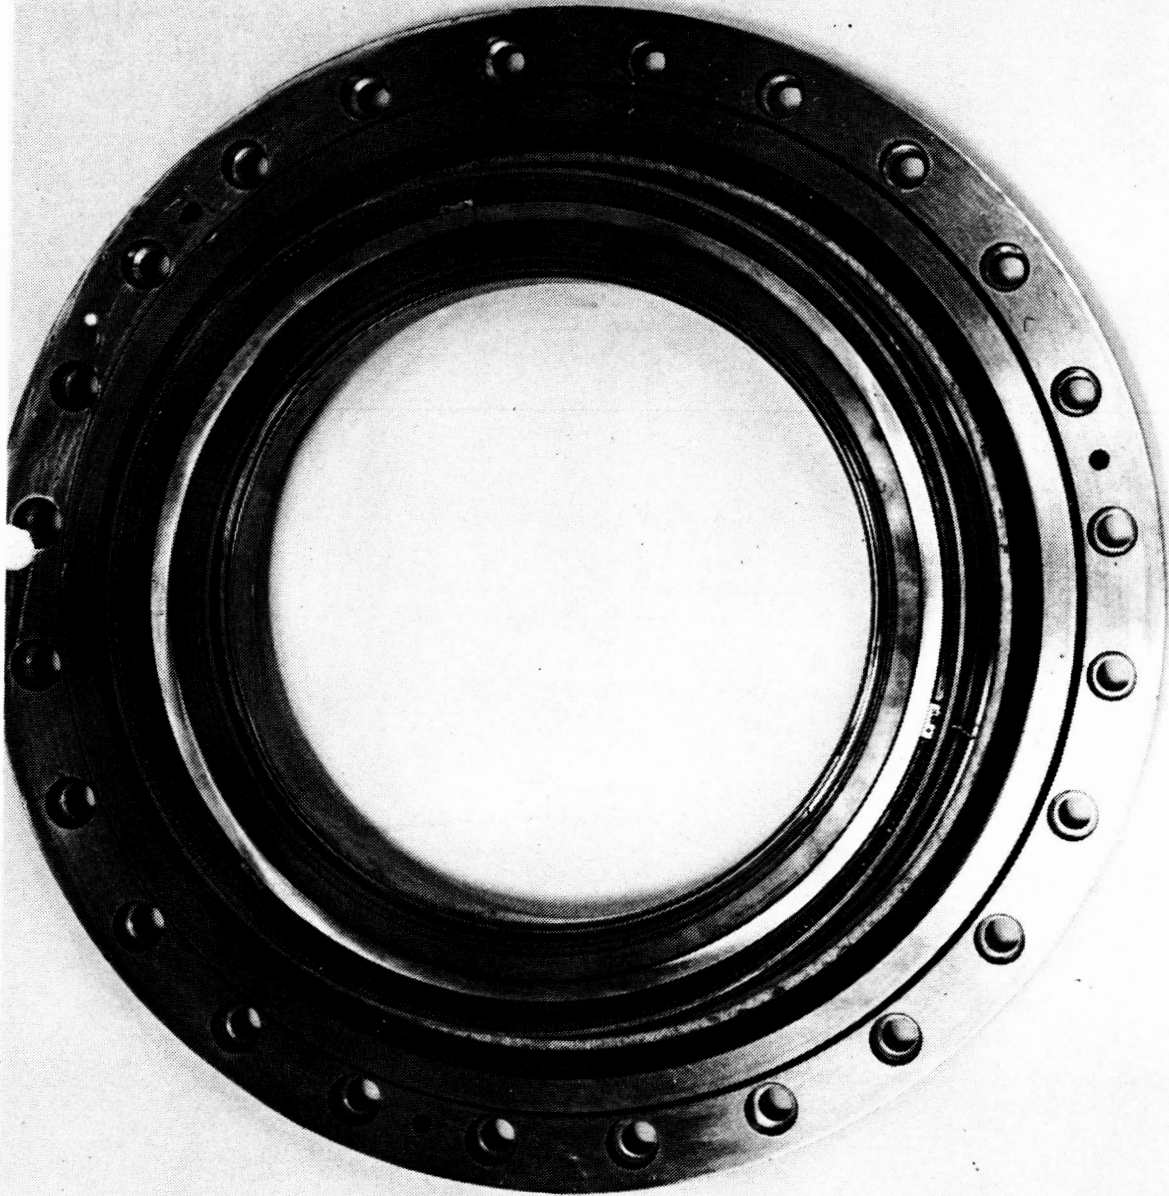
Seal Assembly Before Spiral Groove Bearing Tests, Build 23.
